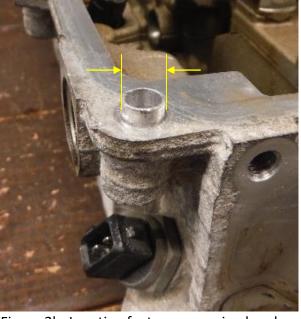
Locating feature on engine head has larger OD than fastener sleeve ID.
